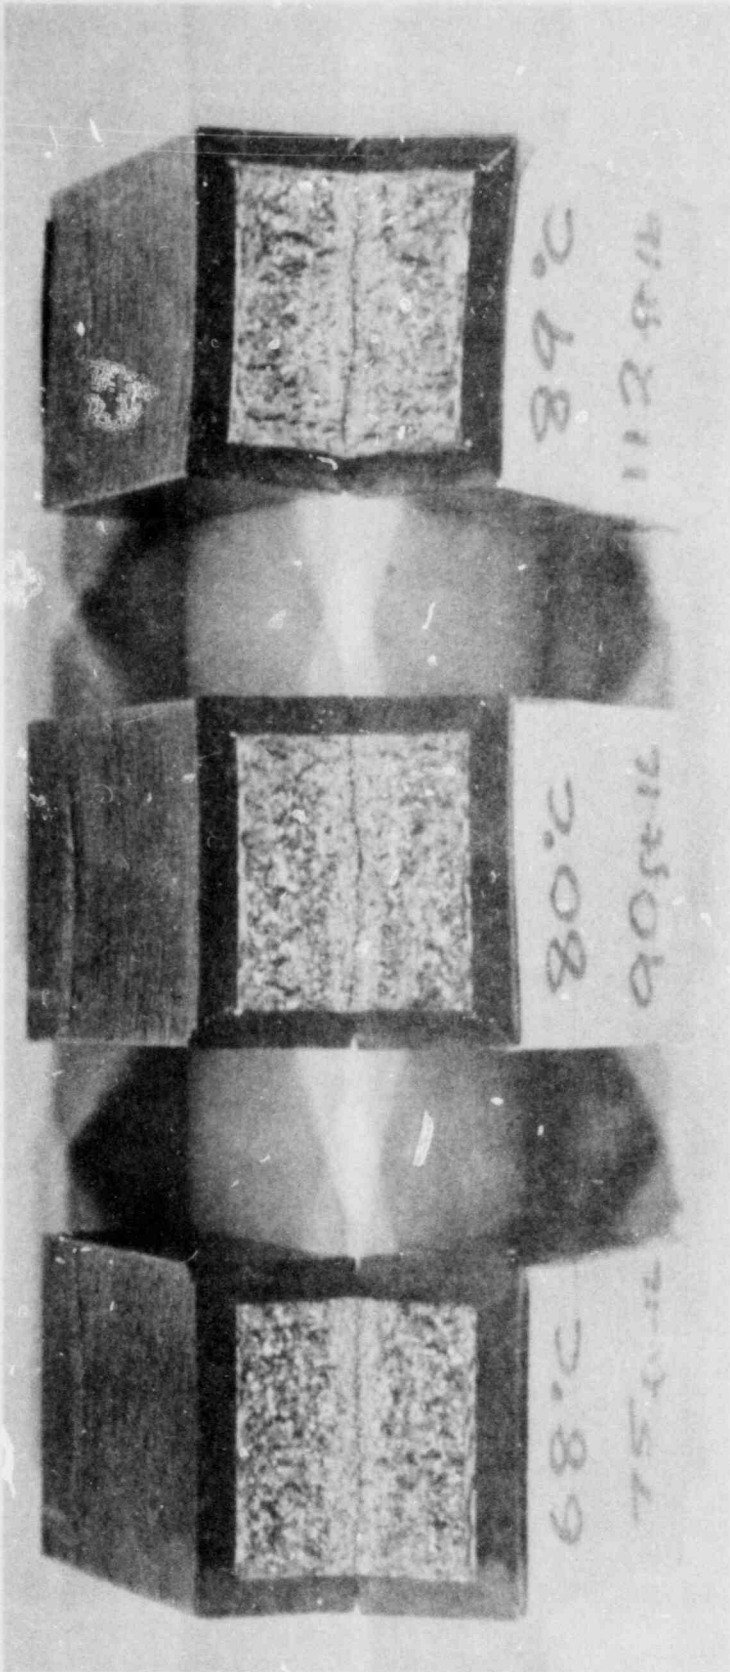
Fracture surface appearances of SGDW specimens.
